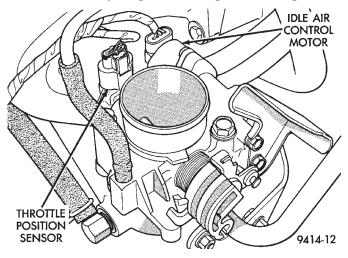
Throttle Position Sensor and Idle Air Control Motor—2.0L
